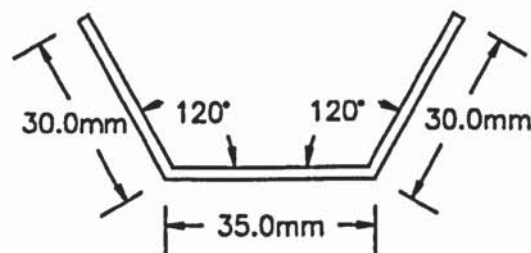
Trapezoidal Section (CRF Mill No:2)
